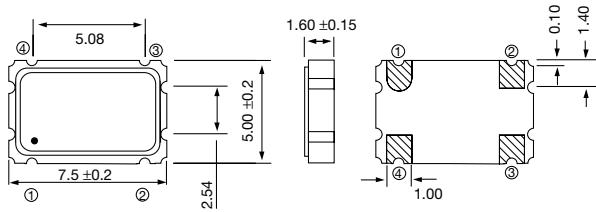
ECS-3951C/3953C Top, Side and Bottom views
